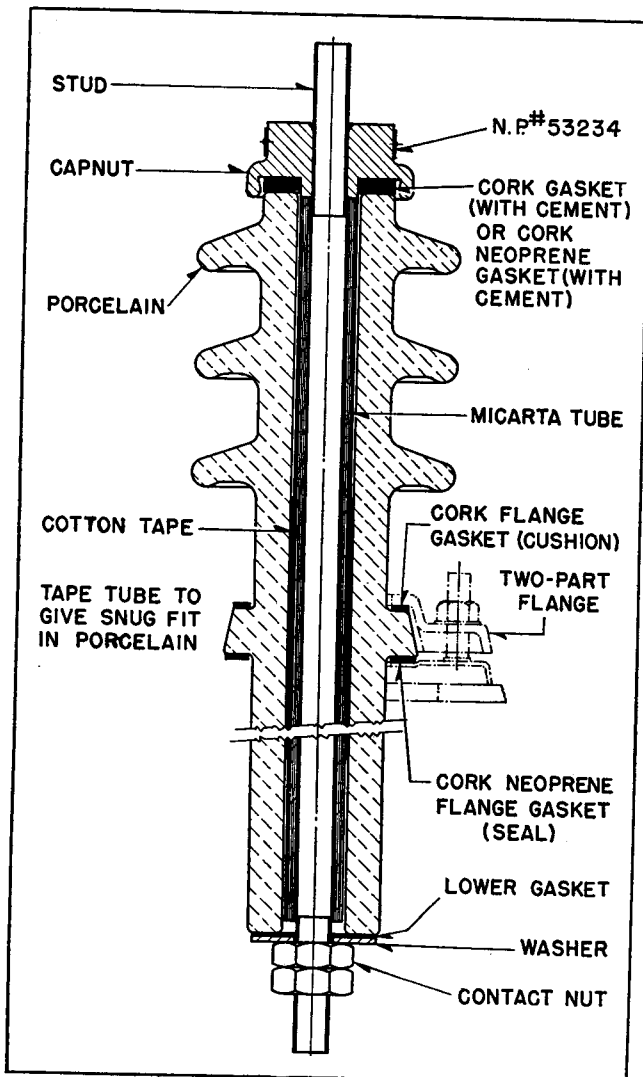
Cross Section of a Typical Bulk Type Bushing.
